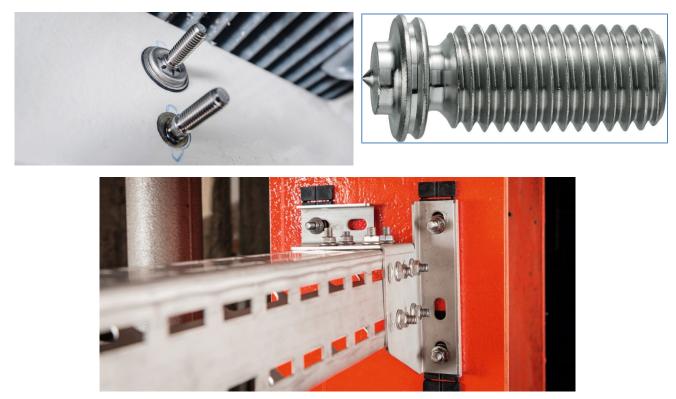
Example of fusion welded stainless steel stud with sealing washer. Photos: Permission to use from Øglænd systems
